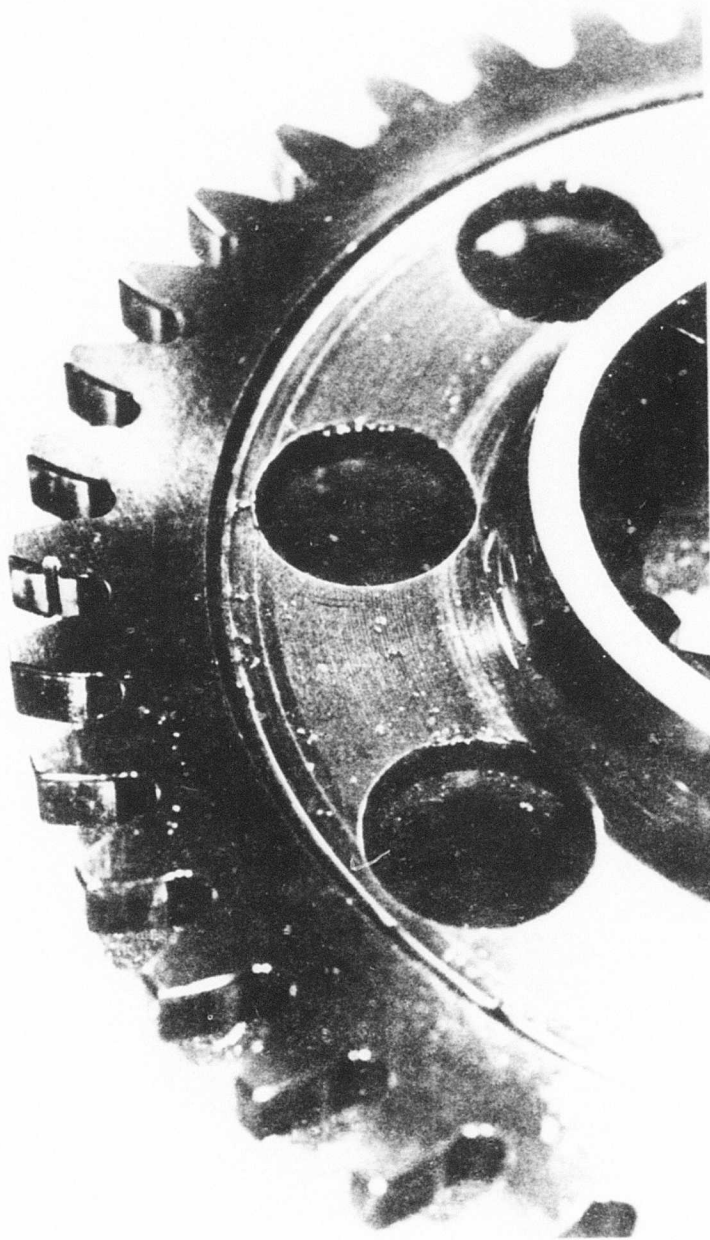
Gear With 0.020-Inch-Wide Tooth Fault.
